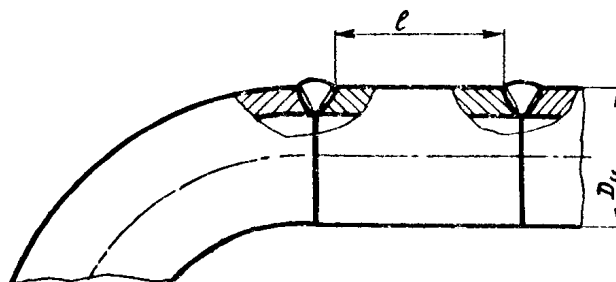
Arrangement of welds in case of welding of rings to the pipe:
